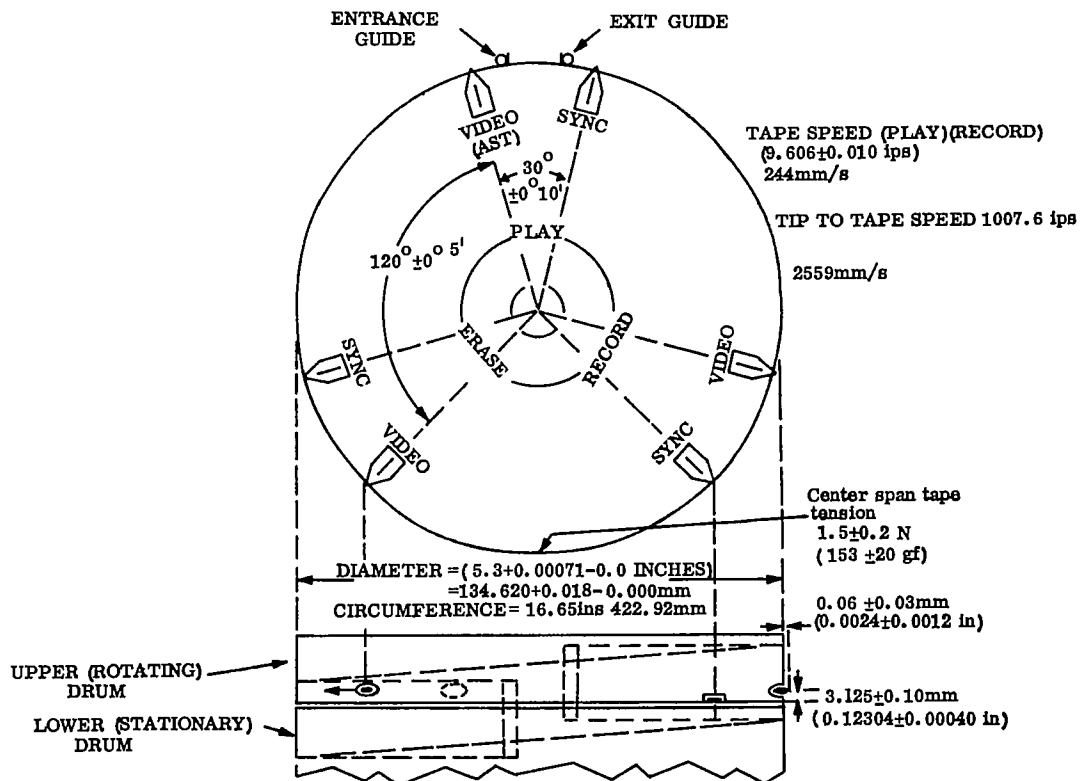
TIP LOCATIONS AND DRUM DIMENSIONS
